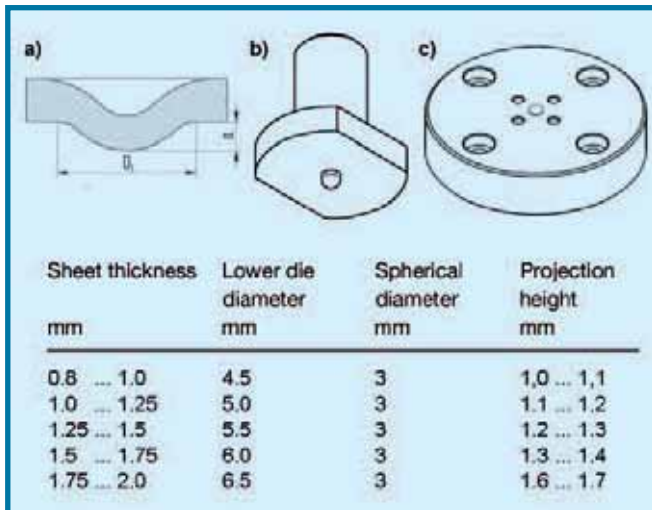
Schematic representation of the optimised projection geometry (a) with a spherical upper die (b) and a lower forming die (c) as well as recommended dimensions according to the table.
